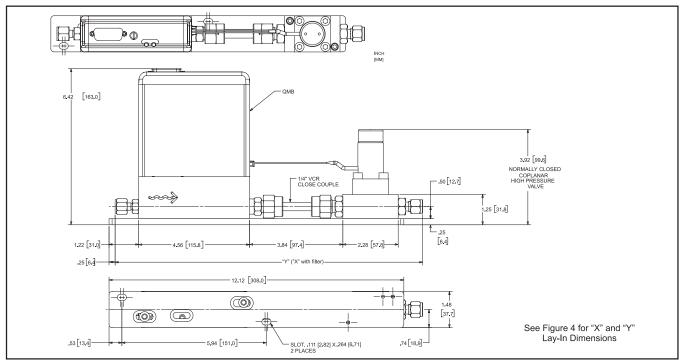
Dimensional Drawing QmB IP40 with Remote Valve
